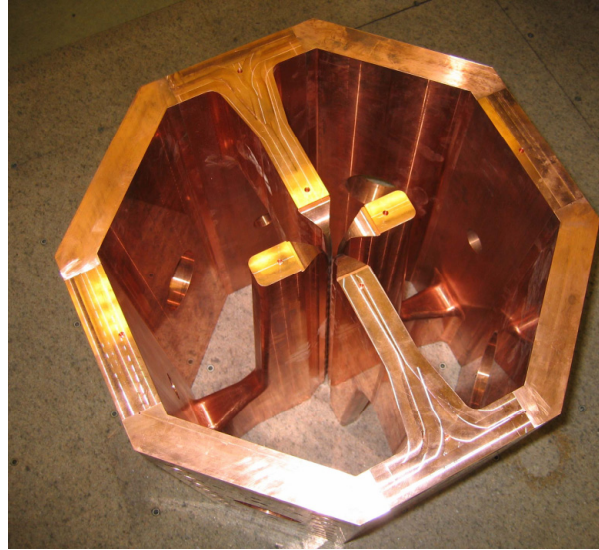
Top view of the pre-brazed assembly of the RFQ cavity.
